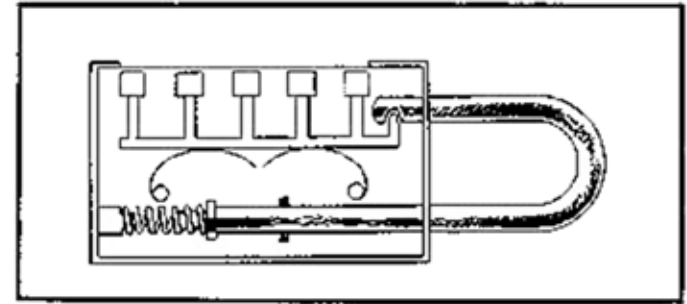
The inner mechanism of a magnetic lock is rather simple.
